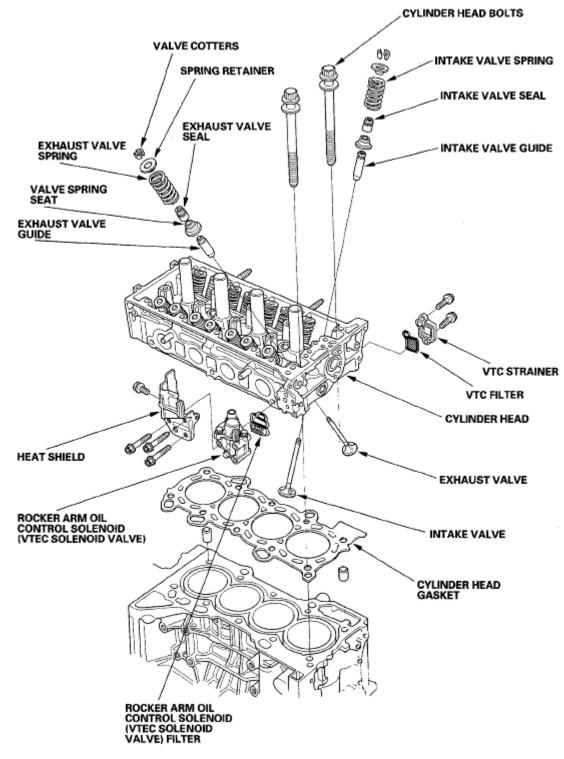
Identifying Cylinder Head Component Location (3 Of 3) Courtesy of AMERICAN HONDA MOTOR CO., INC.
